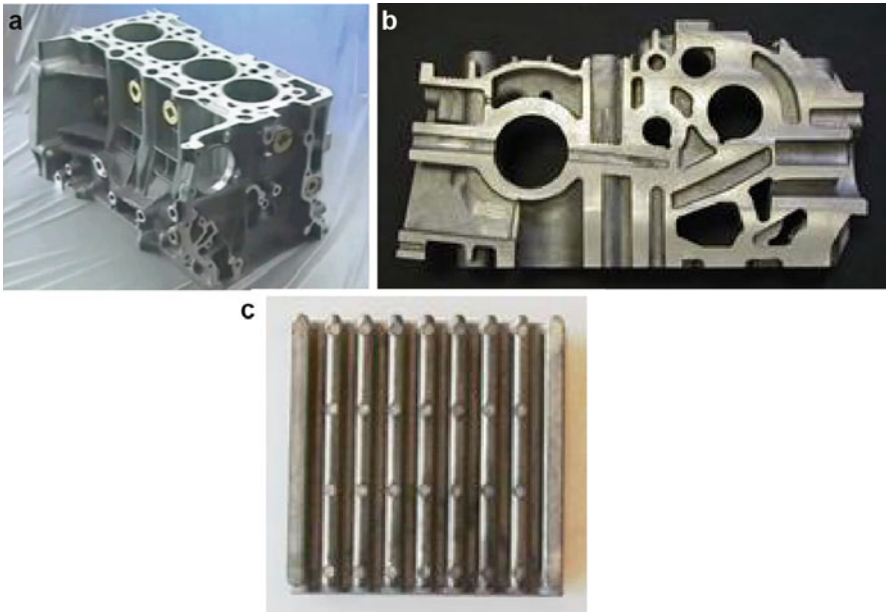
Examples of semi-solid castings used to replace conventional die castings. (a) Diesel engine block produced by Honda [9]; (b) oil pump filter housing [10], and (c) heat sink produced by AMAX [3]
